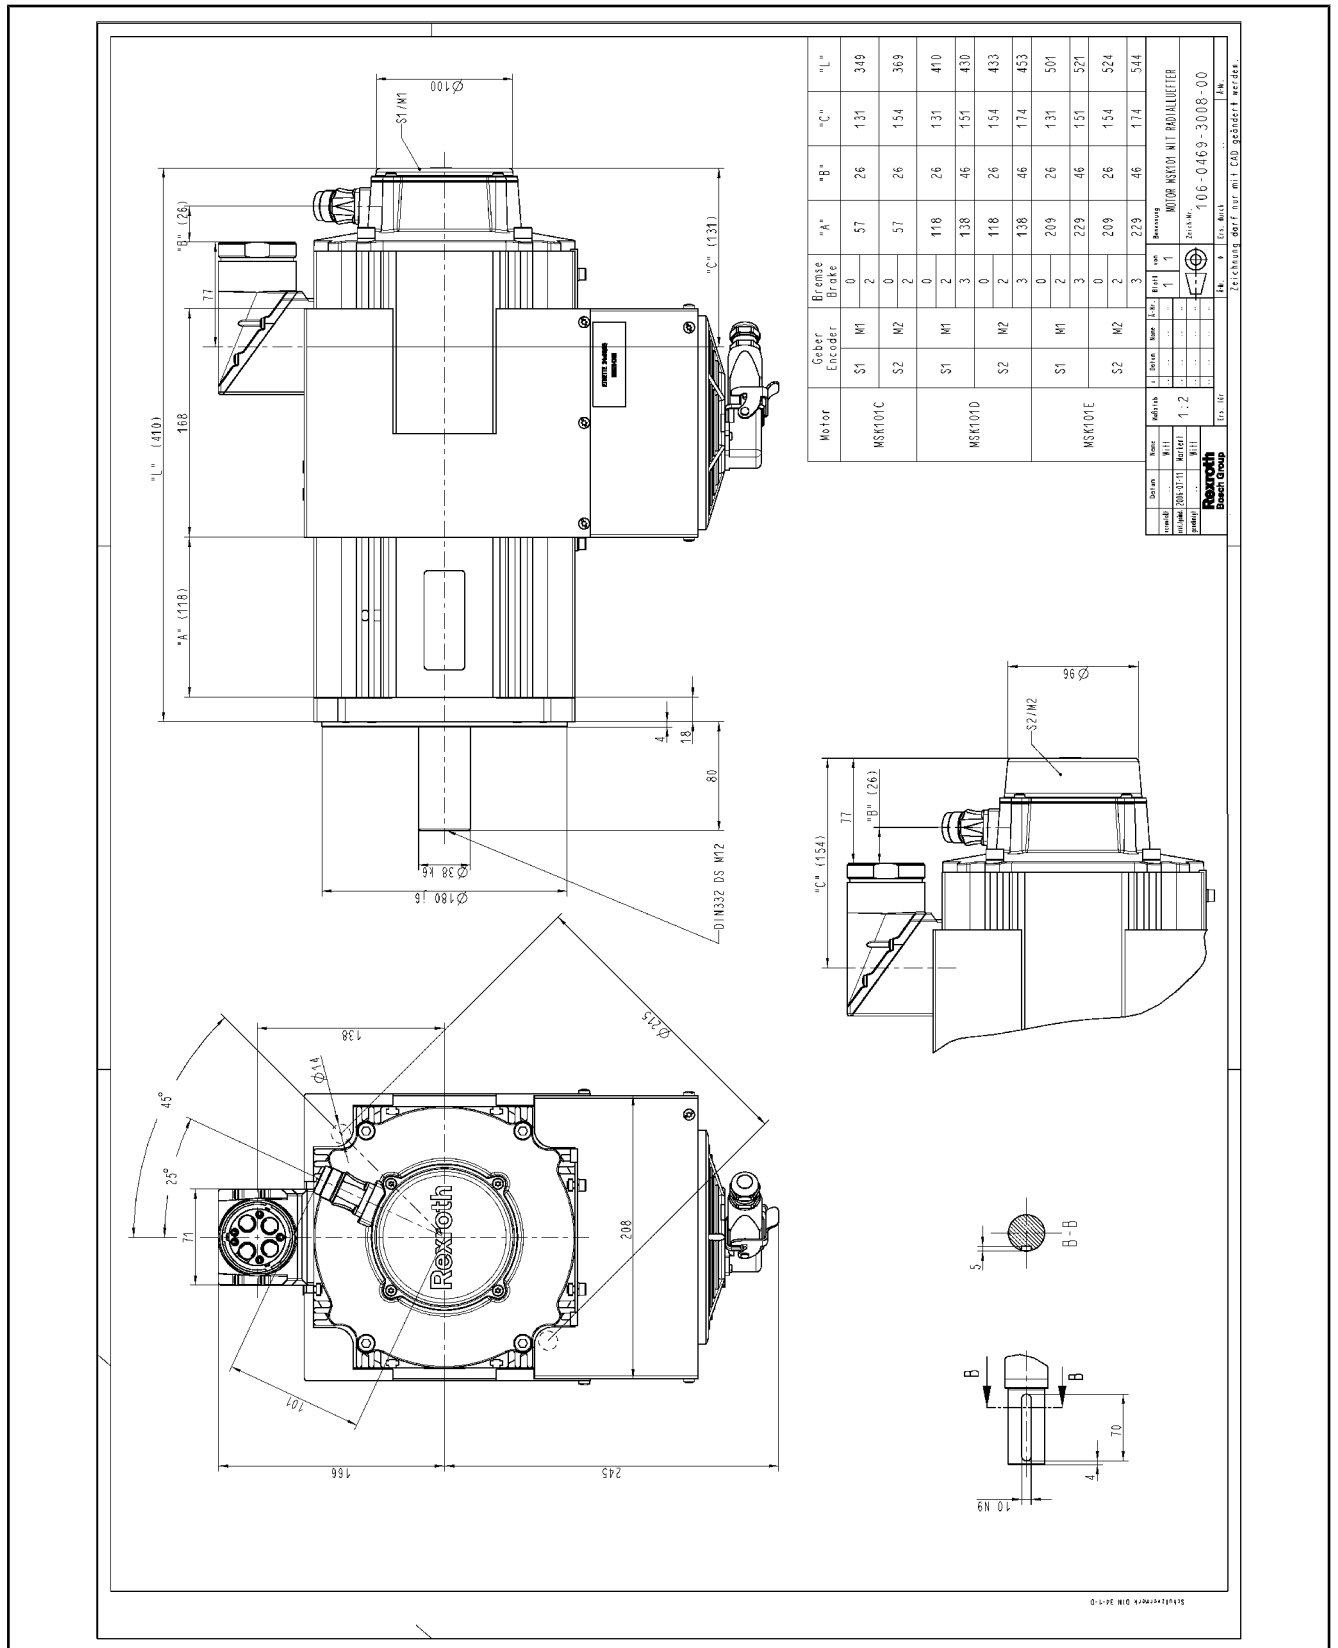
Dimension sheet MSK101 with radial fan unit
